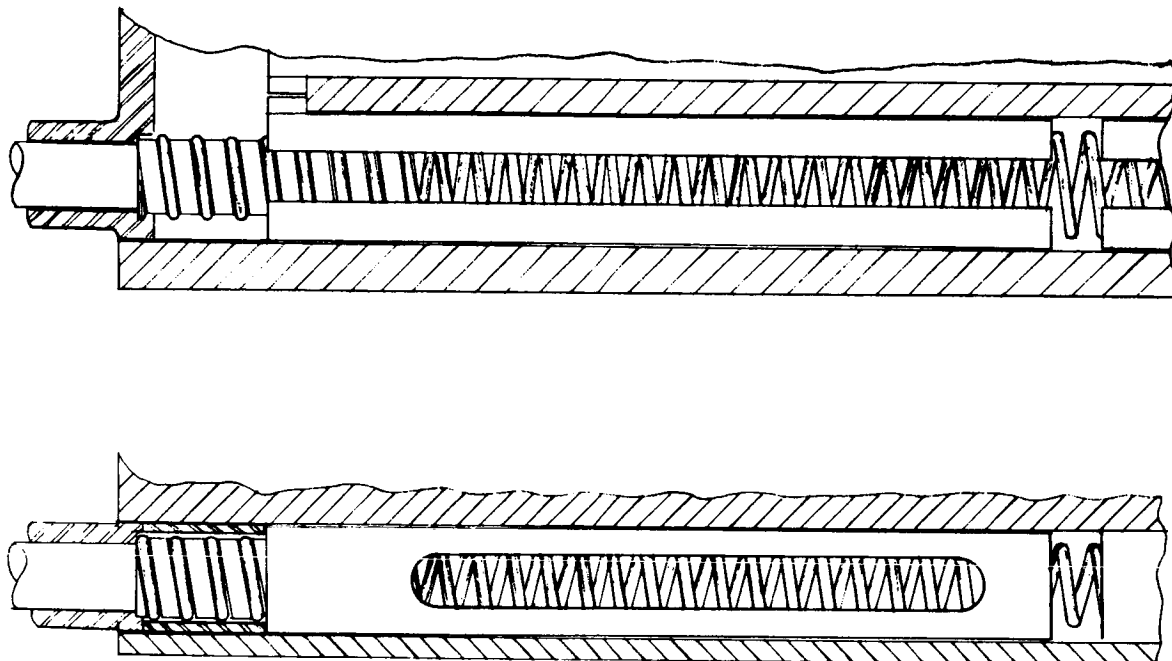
Ceramic installation into the ionizer-manifold assembly.
